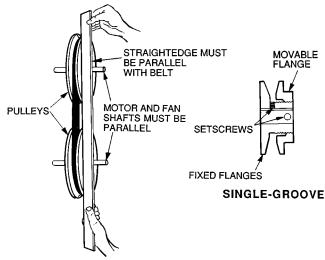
Evaporator-Fan Alignment and Adjustment
